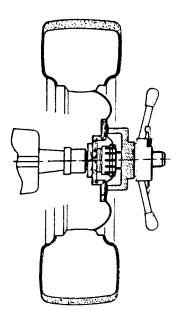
8. Centering with self-adjusting centering spreader sleeves from the rim back and fastening with clamping cap or pressure ring and quick-clamping ring nut from rim front:
